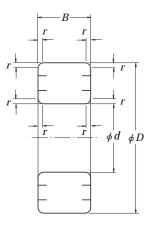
Boundary Dimensions of Radial Ball and Roller Bearings
